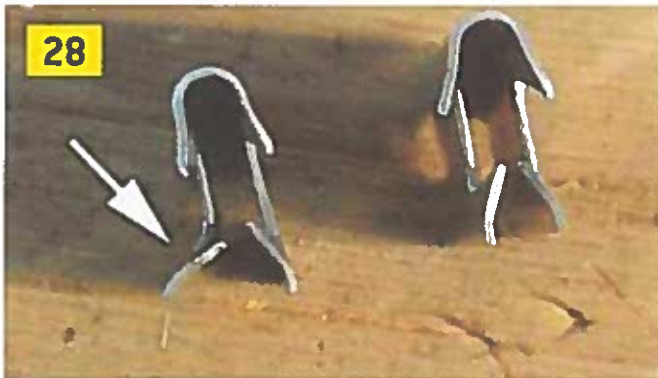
Bend one side of the clip out to form a flange that will lock inside the seal channel.
